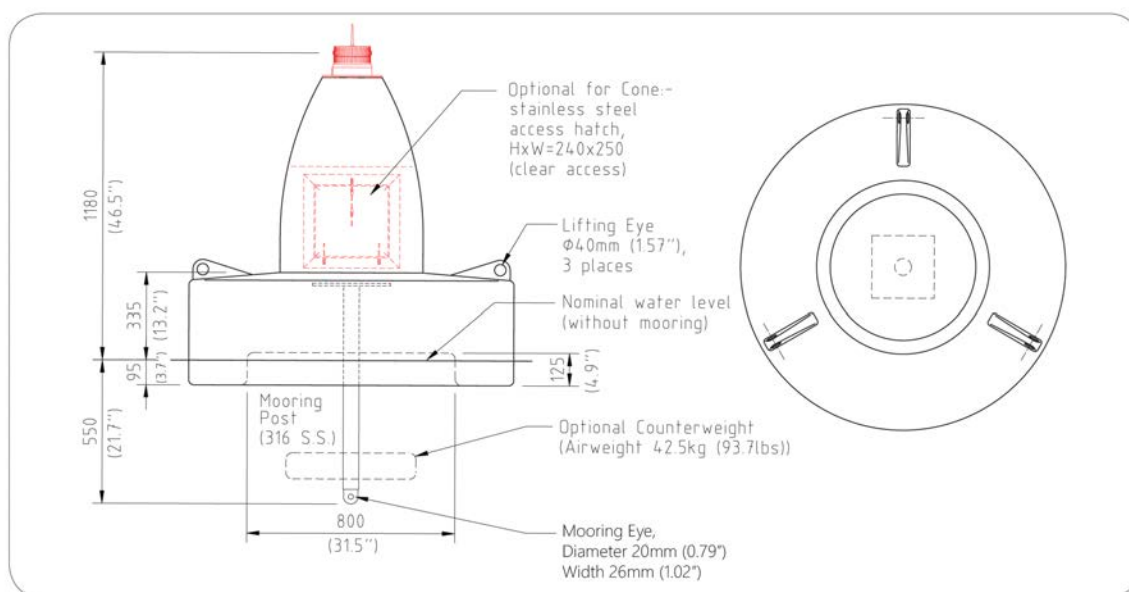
Corner Marker dimensions IALA-Compliant schematic with dimensions (Source: Sealite).
